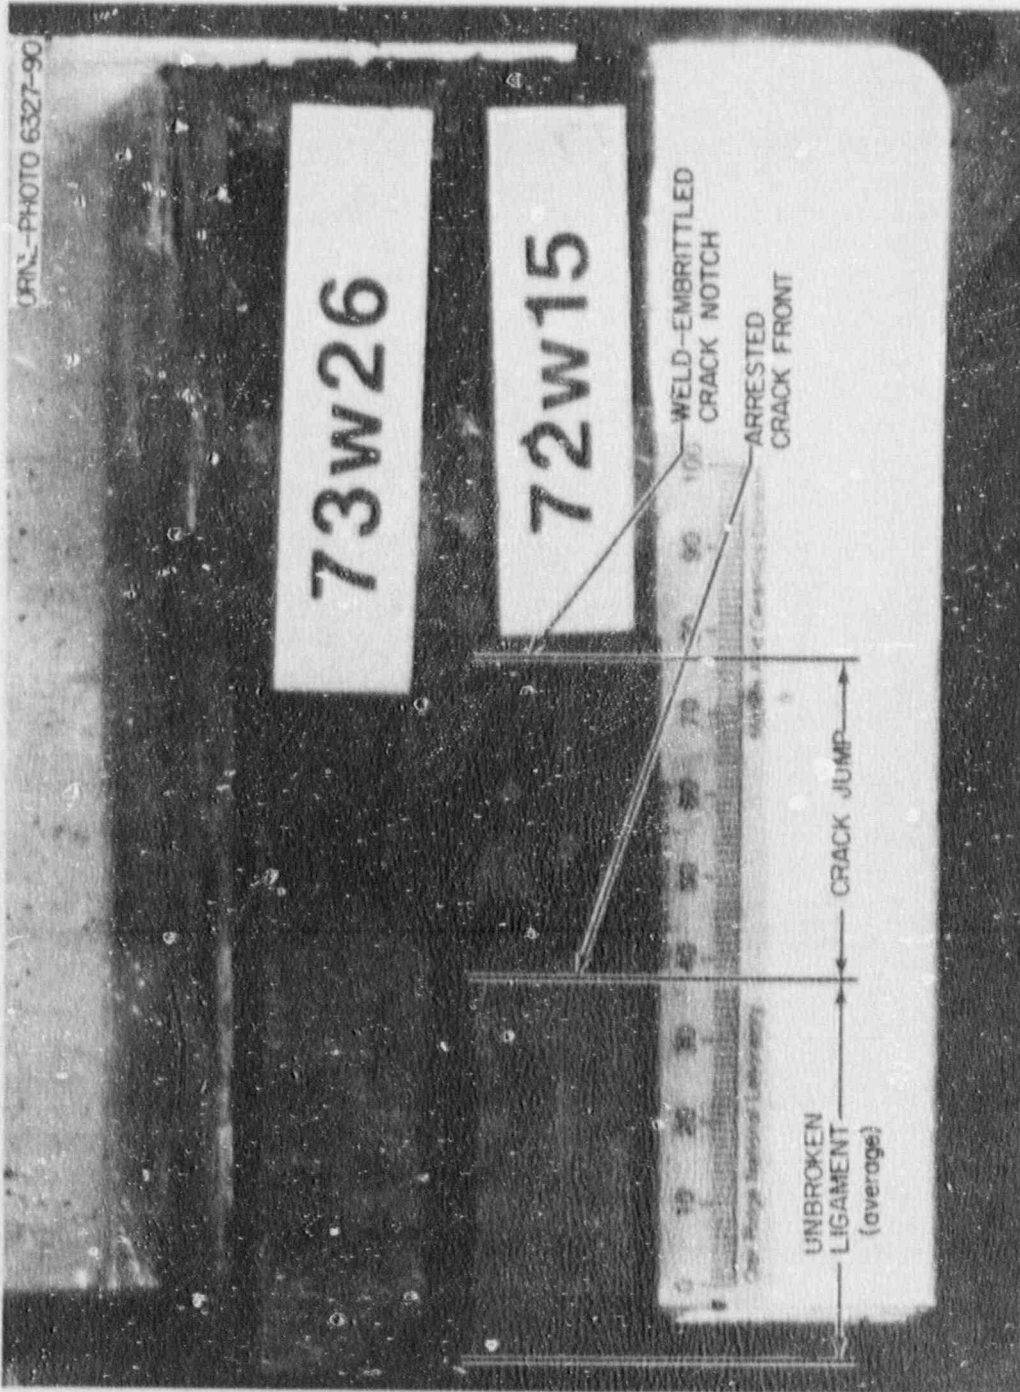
Photograph taken through a Kollmorgen periscope of the fracture surfaces of two typical crack-arrest specimens after heat-tinting and splitting them open. The 2- or 3-mm, darker, transverse strips near the initial crack front are the brittle crack-starter weld beads.
